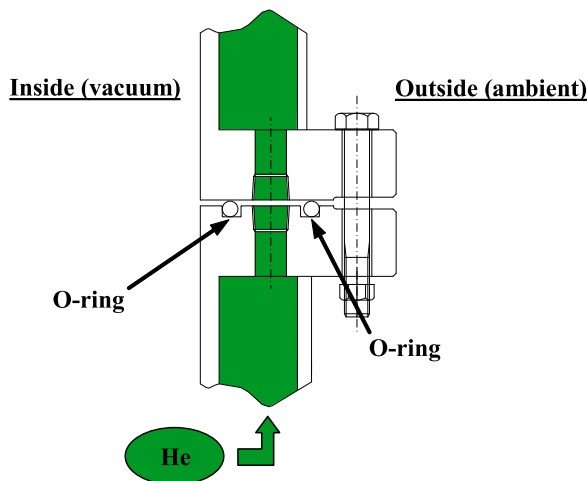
Enlarged partial drawing of flange for outer shell of SAFETY-BOX.
